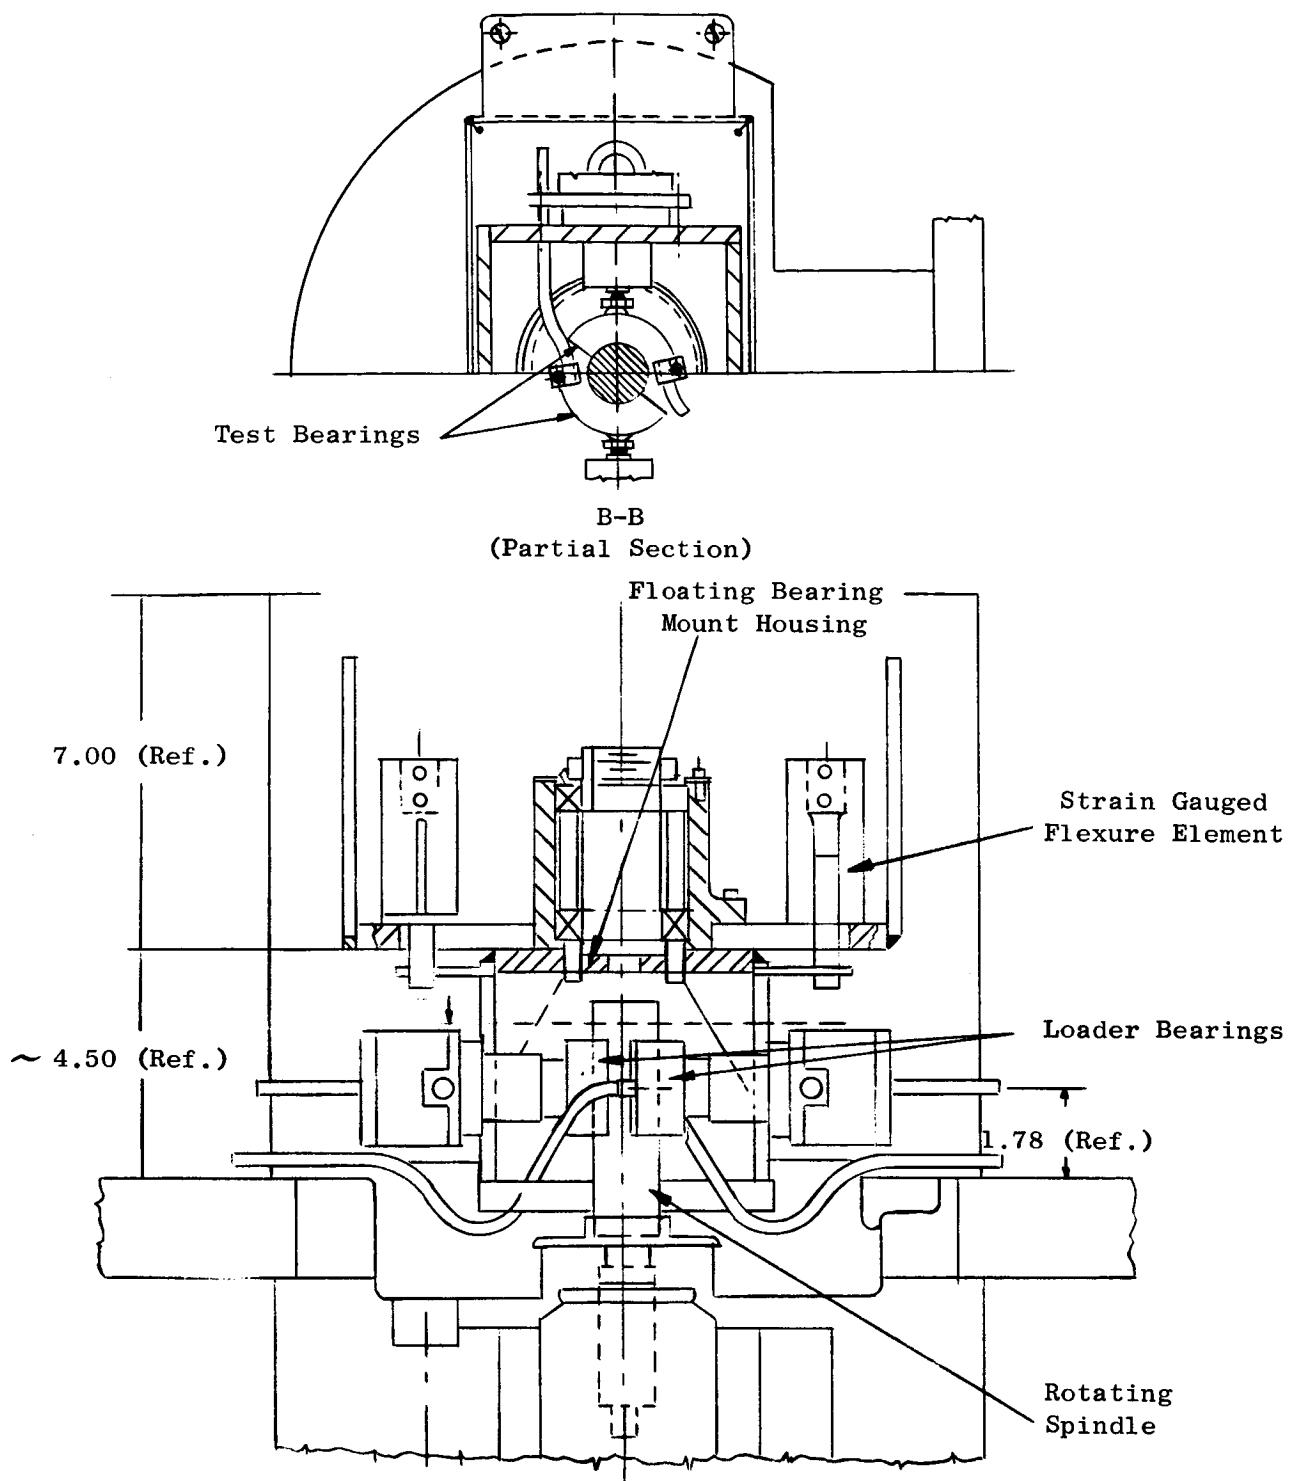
Test Rig for Measuring Loader Bearing Friction Torque.
